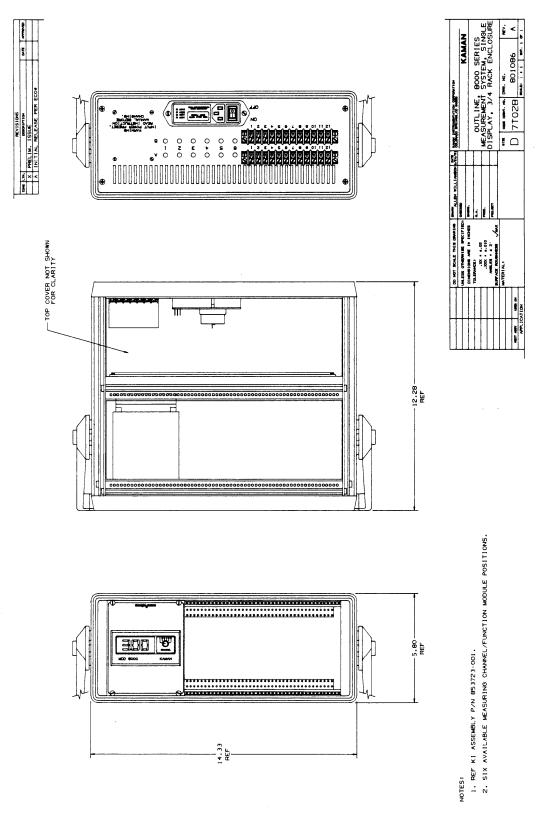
$\frac{3}{4}$ Rack with Display Outline Drawing
